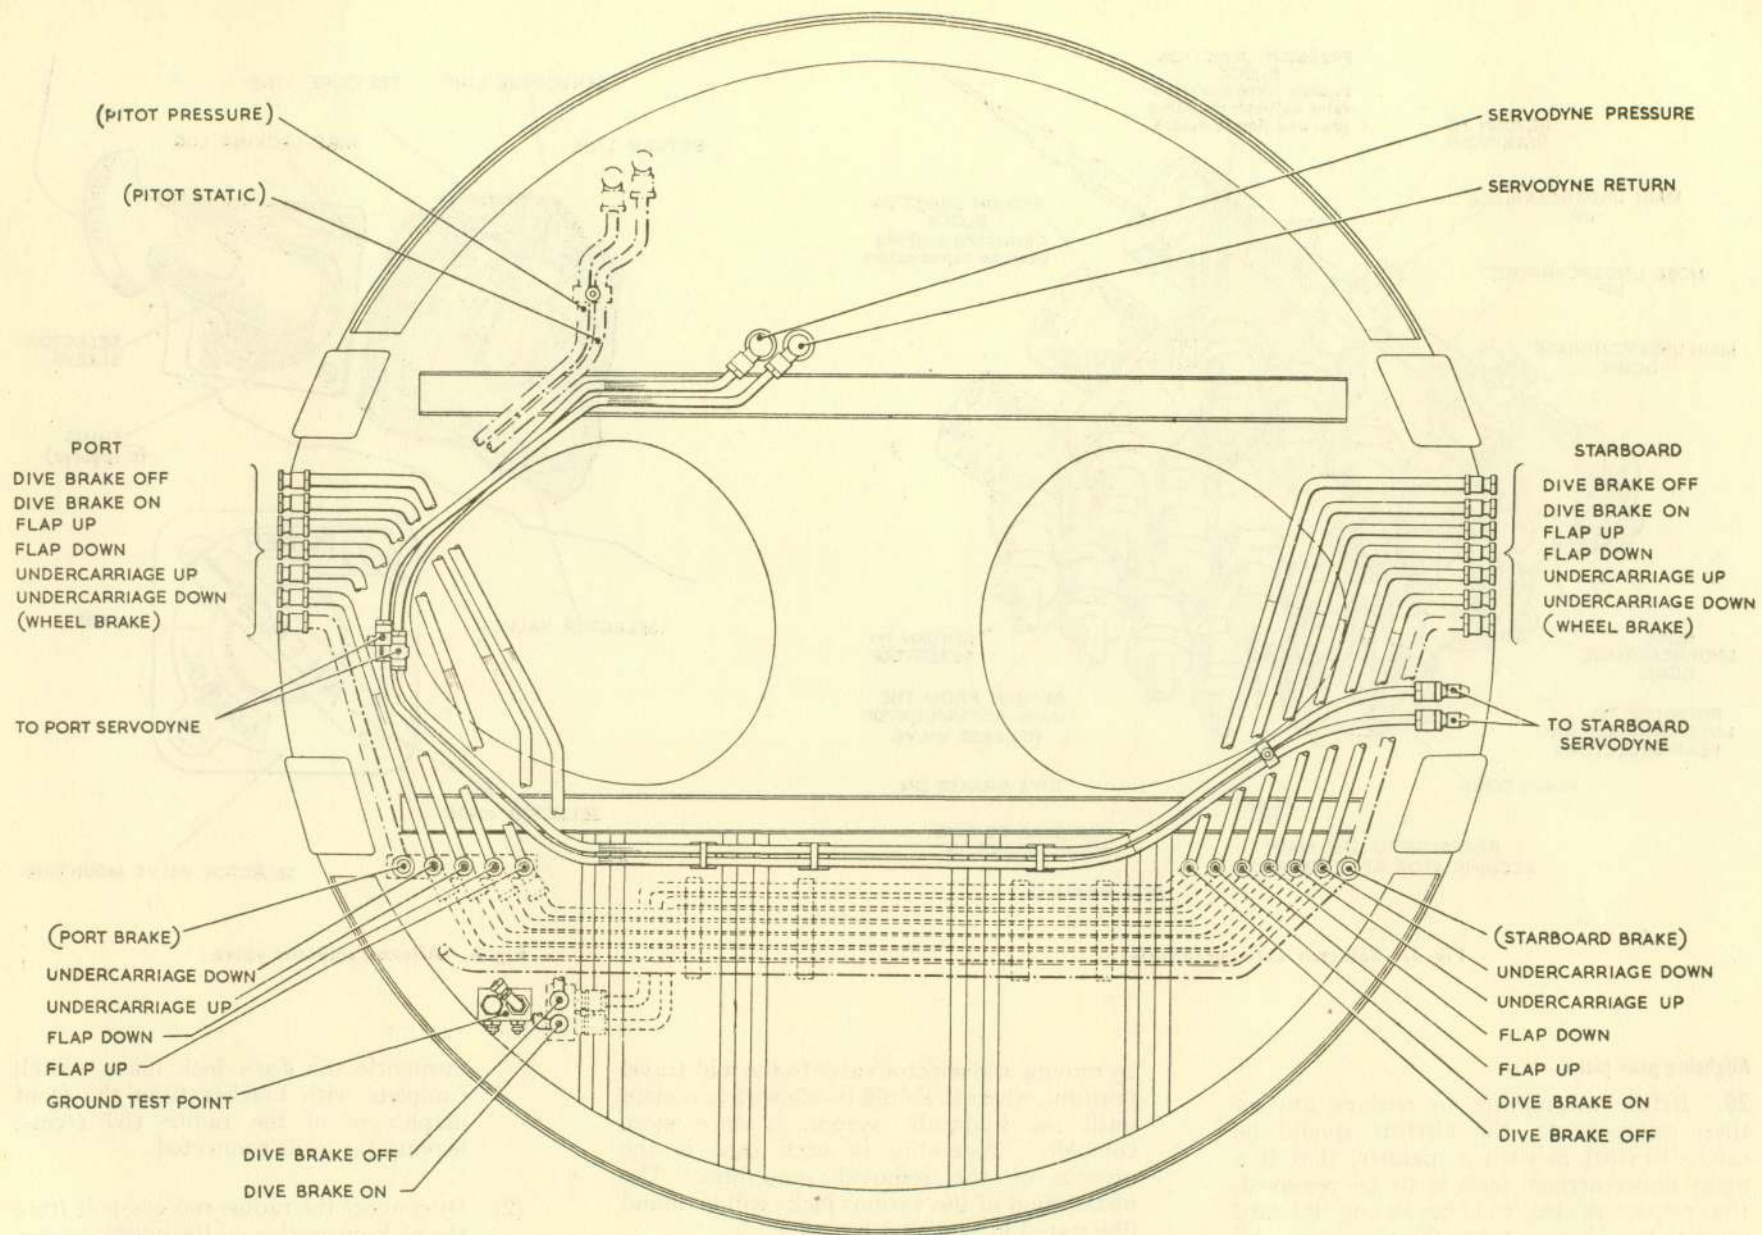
Hydraulic pipe-lines on aft face of fireproof bulkhead
